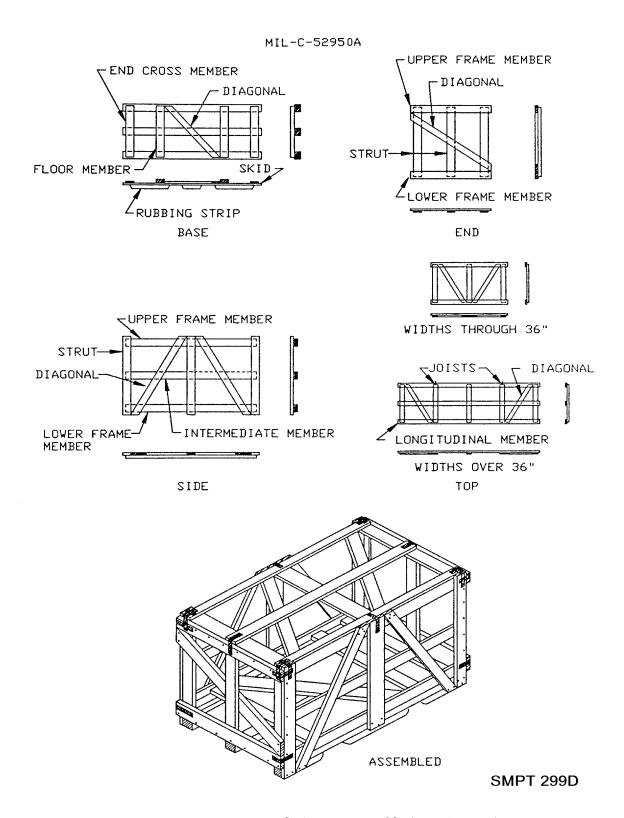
Type V, style A crate assembly (MIL-C-52950).
